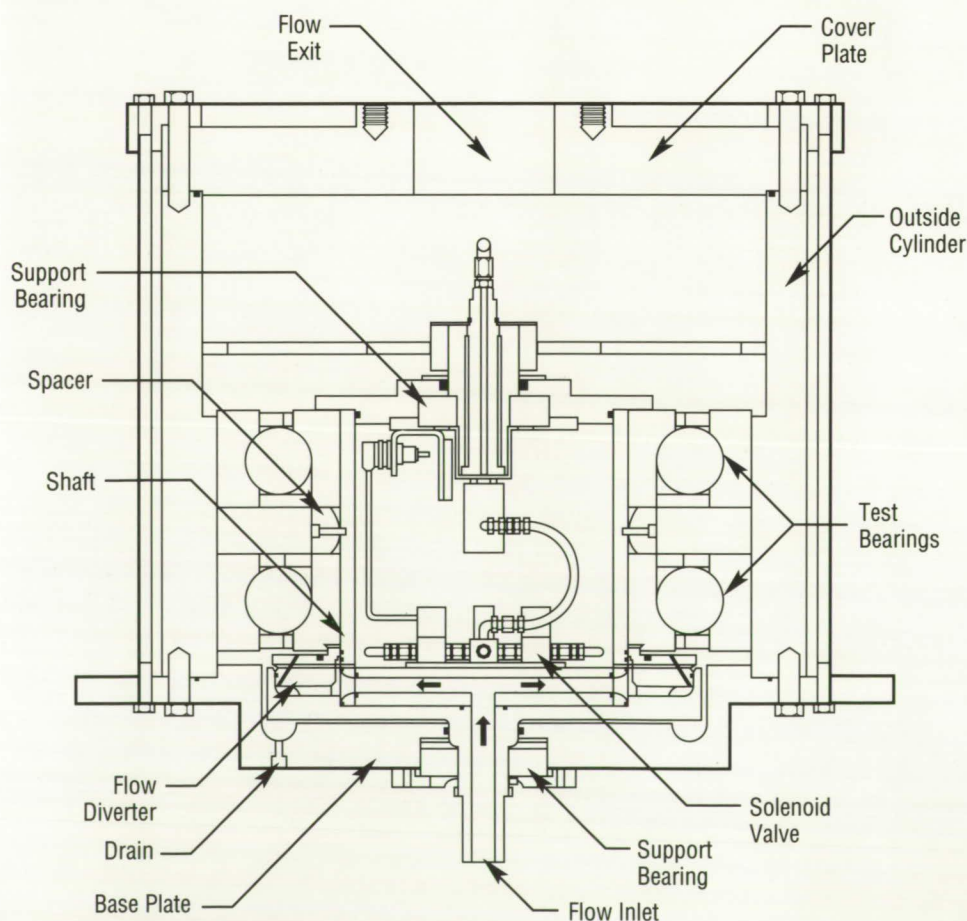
High Pressure Oxygen Turbopump Bearing Coolant Flow Model
